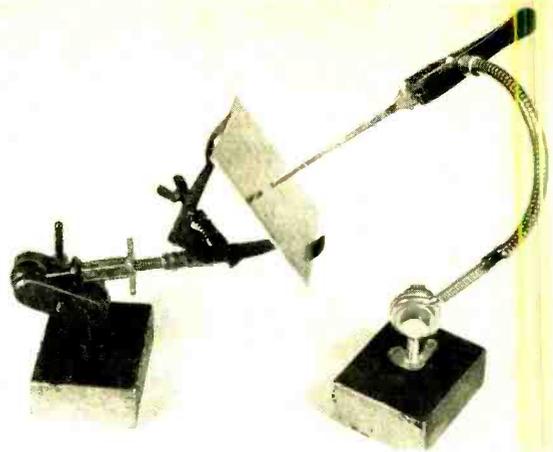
PC BOARD HOLDER is built from a test-tube holder.
